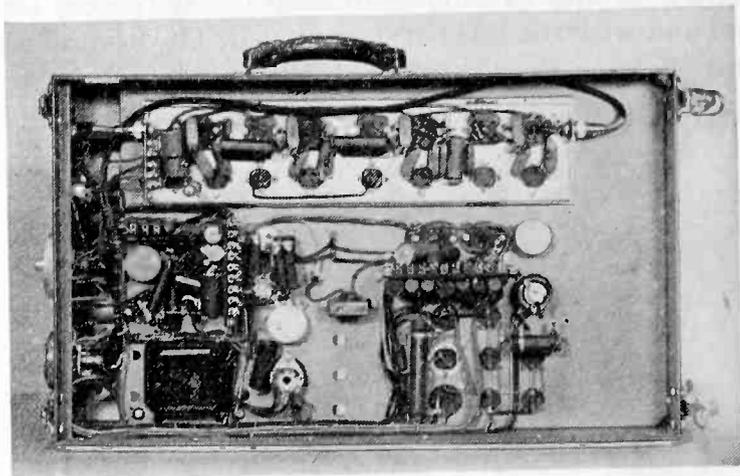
Camera auxiliary unit—circuit-component side, cover removed.
